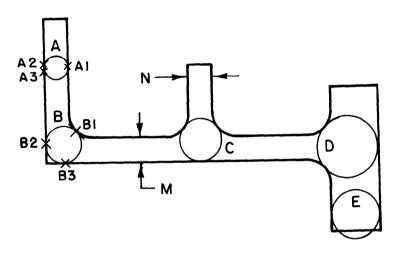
IDENTIFYING SECTION THICKNESSES FOR DIE BEARING DETERMINATION
